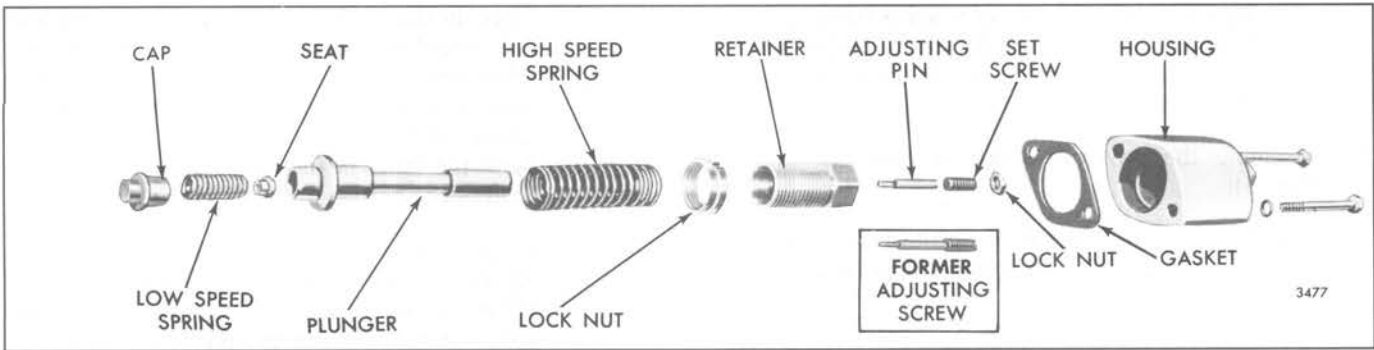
High and Low-Speed Springs and Plunger Details and Relative Location of Parts
